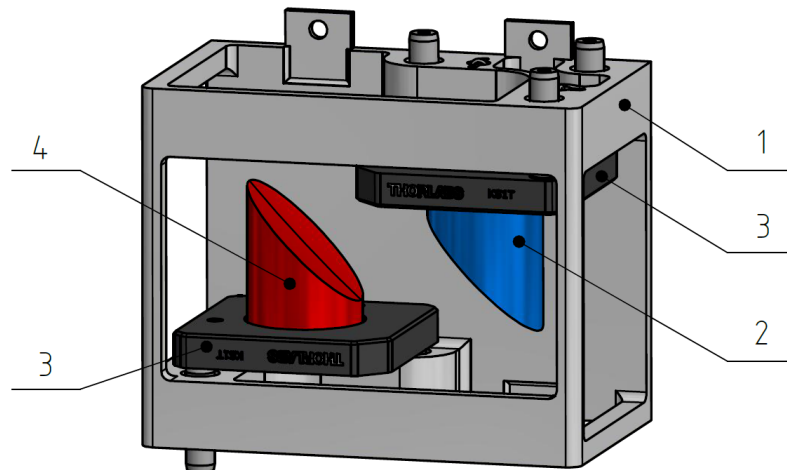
Collecting optics cage mount. 1 - collecting optics cage, 2 - primary parabolic mirror with hole, 3 - lower plate of Thorlabs KS1T mount, 4 - secondary parabolic mirror.
